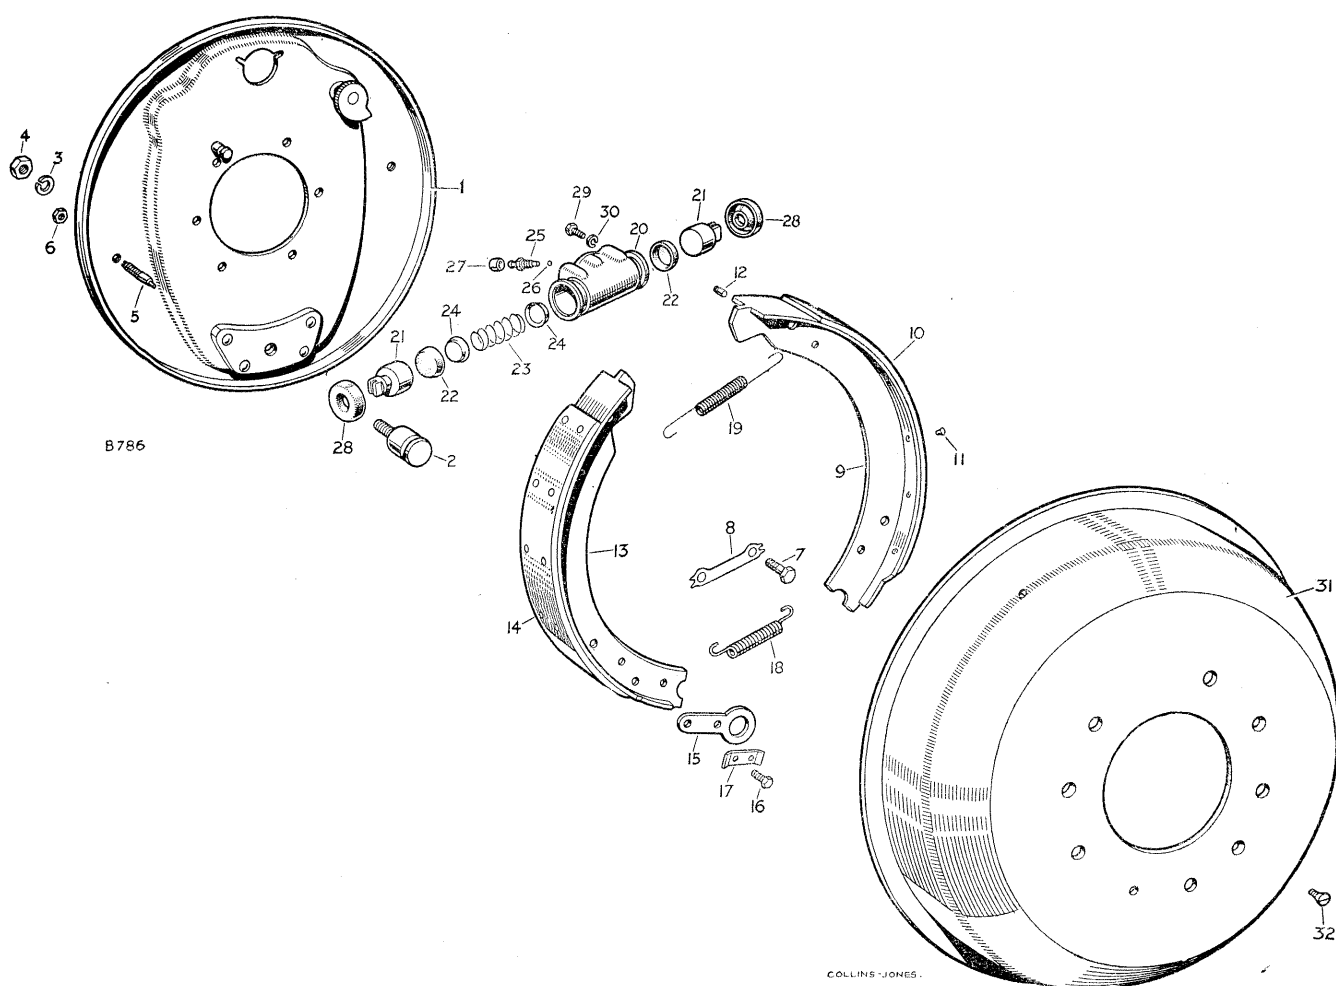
Layout of wheel brake unit—front and rear (10" brakes)
